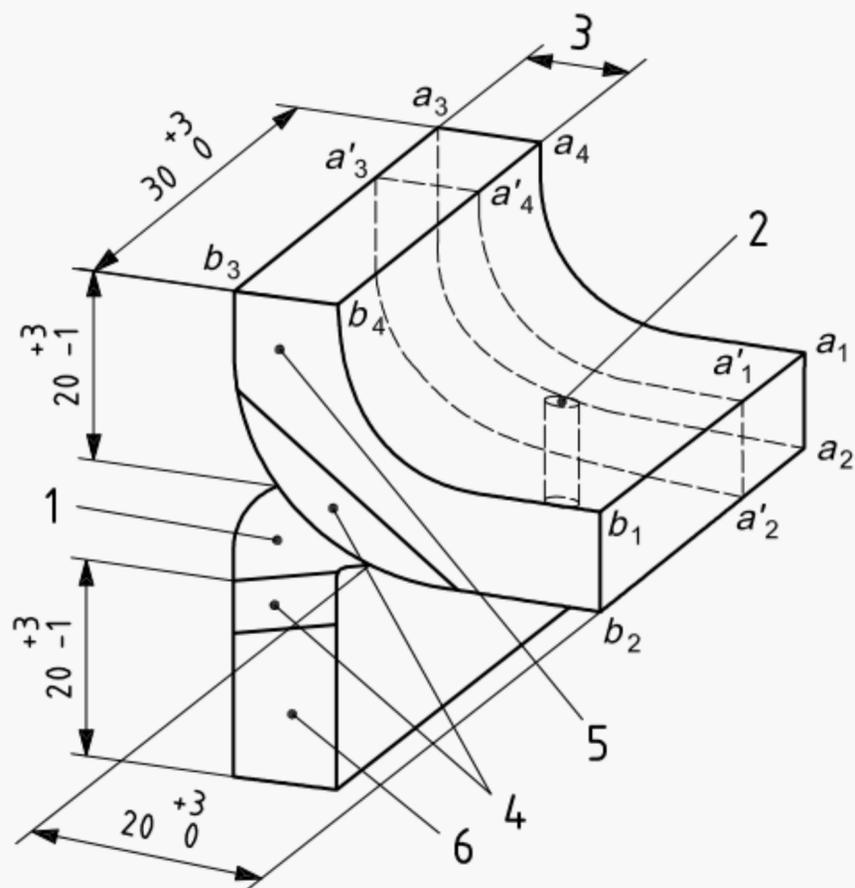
Specimen shape and dimensions — weld material
